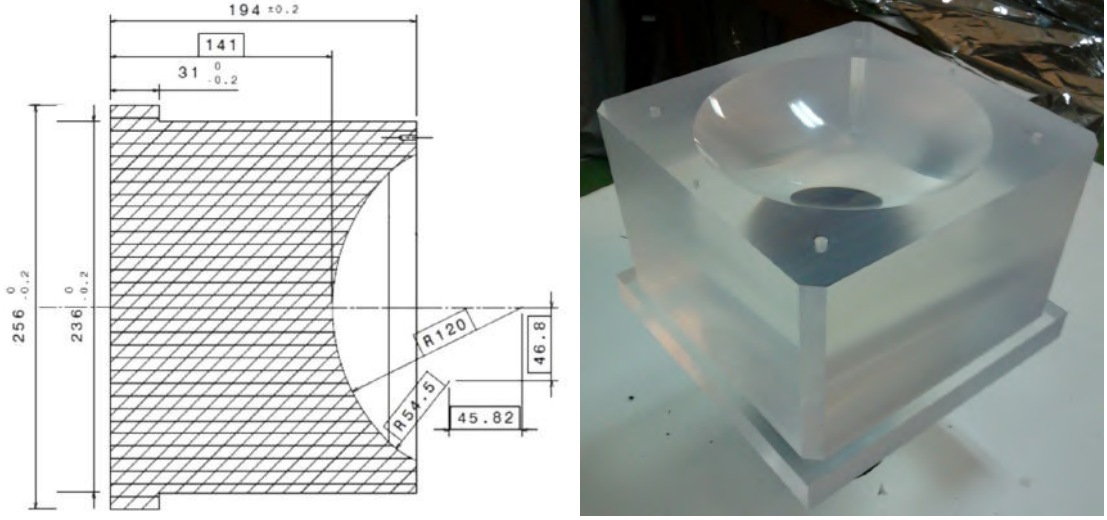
Geometry of a polystyrene cuboid scintillator block designed for the SuperNEMO demonstrator. The polystyrene is hollowed out to receive the photomultiplier bulb.
